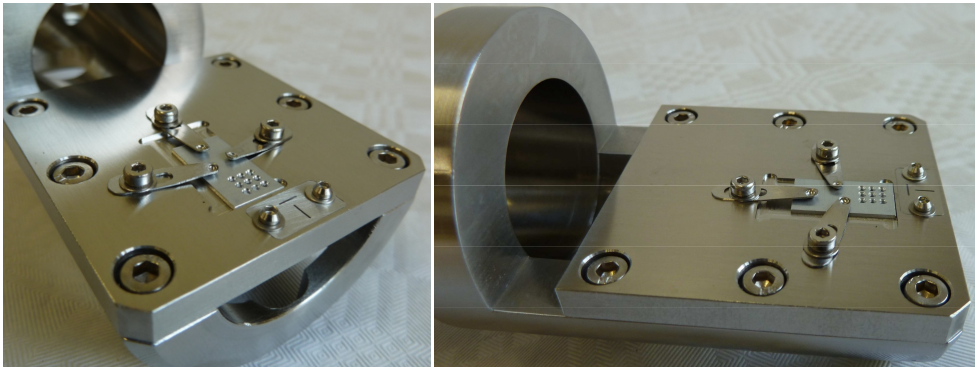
Photographs of the *zone plate holder* especially describing the attachment process for the *zone plate chip*. This attachment is done via three fitting springs which are connected to the holder plate through hexagon socketed screws. (Fitting spring concept developed by Kurt Ansperger [83])
